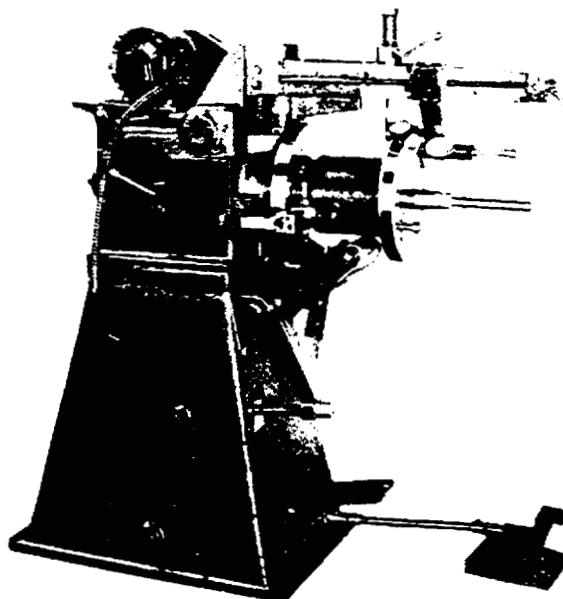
Typical Machine for Checking Coupling-Thread Alignment
